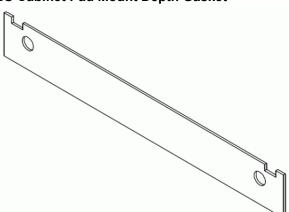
NEBS Cabinet Pad Mount Depth Gasket
